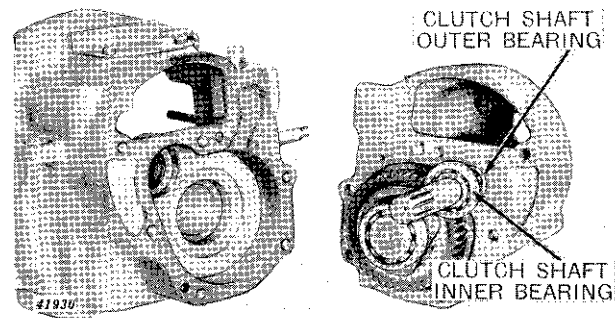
Clutch Housing and Transmission Housing Separated
